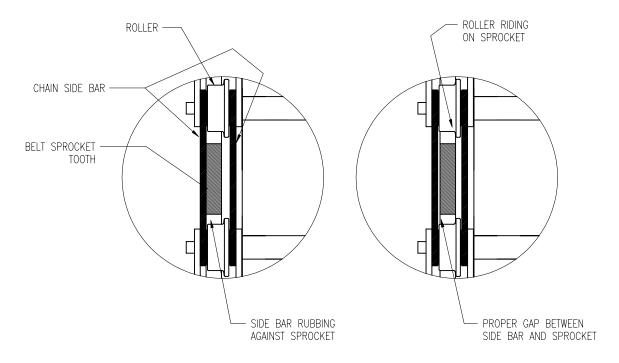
Top view of head or tail shaft at belt sprocket showing proper clearances between belt side bars and sprocket teeth.
